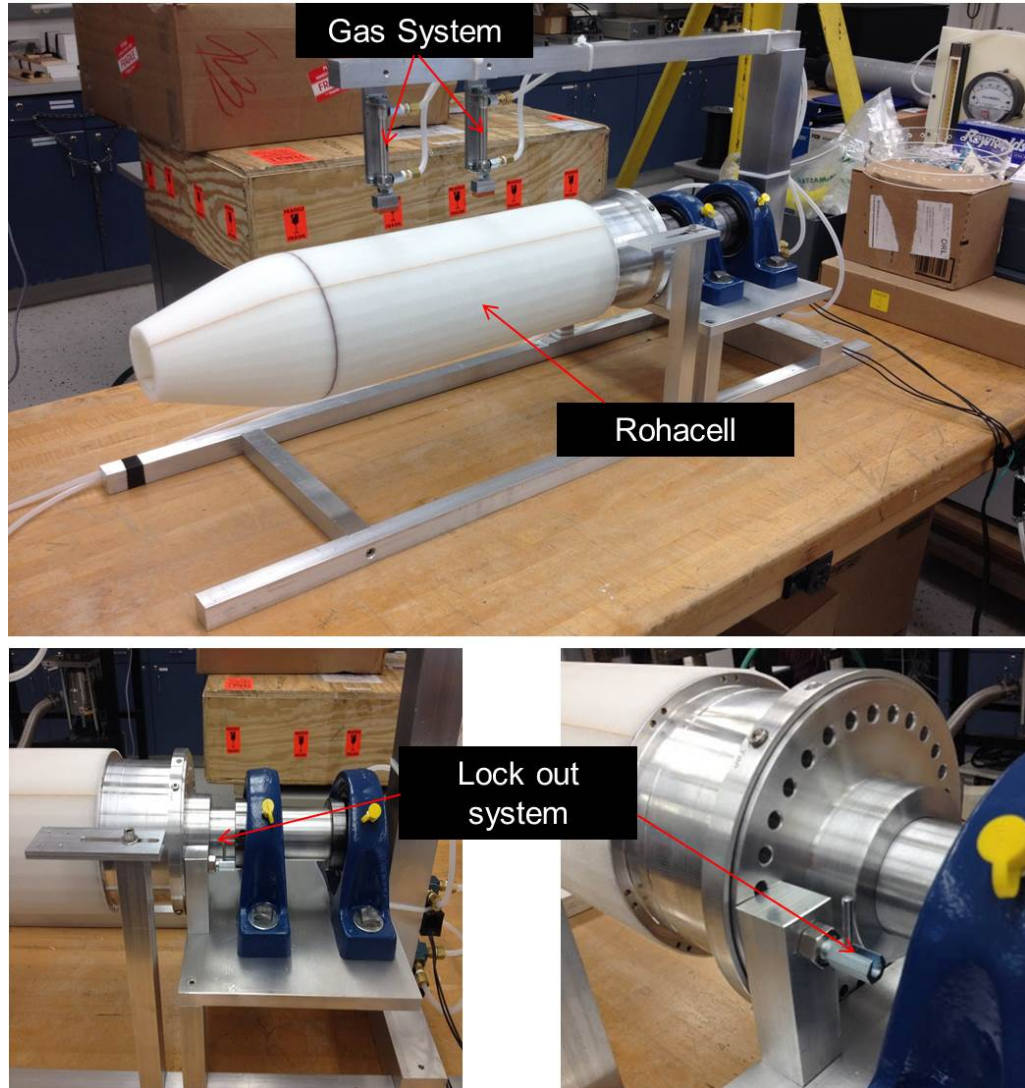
Assembly jig and lockout system. Rohacell support structure mounted on assembly jig and lockout system.
